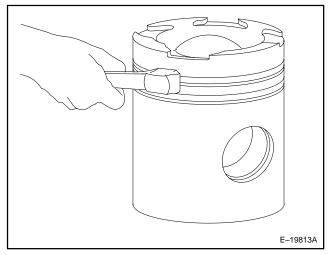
Cleaning Piston Ring Grooves With Scraper (Typical).
